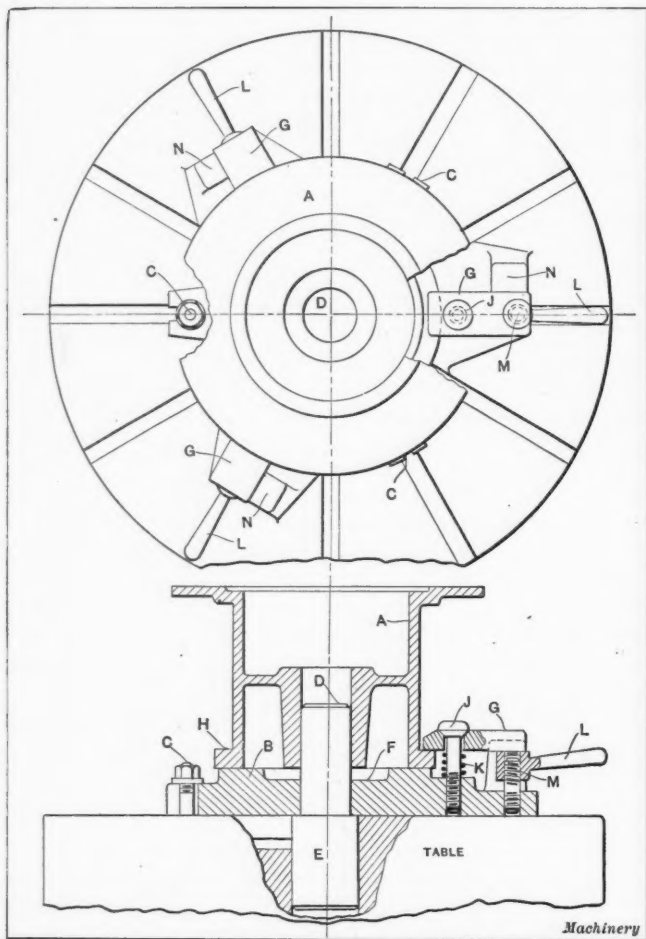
Quick-acting Clamping Device for Vertical Turret Lathe
